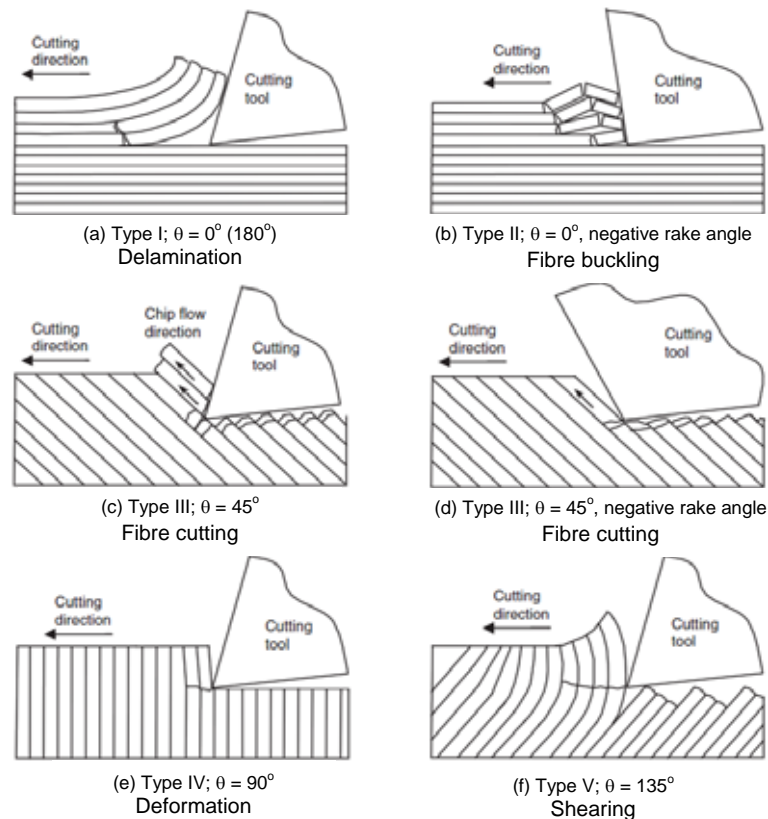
Cutting mechanisms in the orthogonal machining of FRP composites [48]
